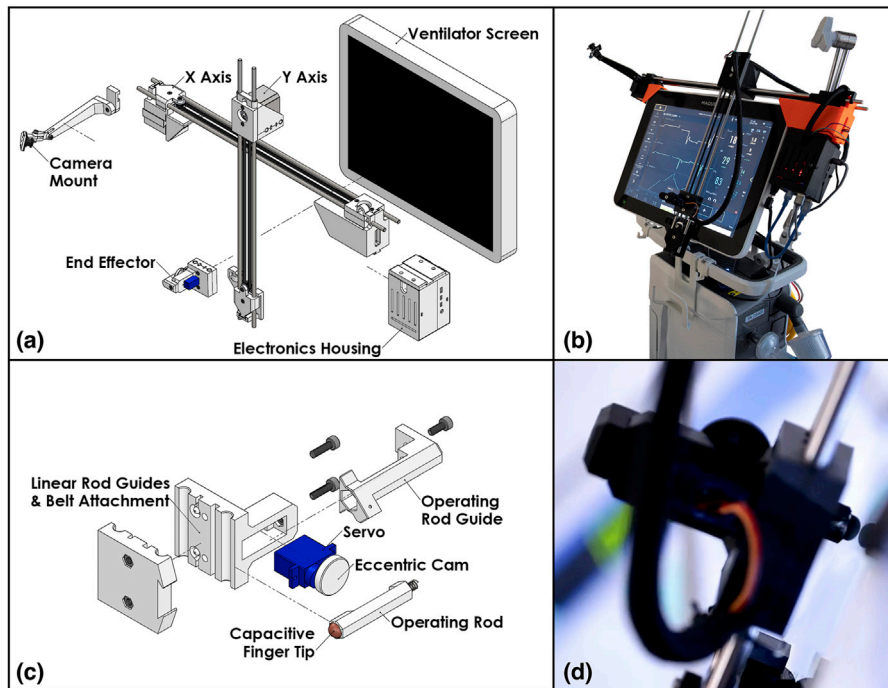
| The patient side robotic ventilator controller: (A) exploded view drawing of the robotic system, (B) photo of the robotic system installed on a Maquet Servo-U ventilator, (C) detailed exploded view drawing of the end effector assembly, (D) close-up photo of the end effector operating a Servo-U ventilator.
